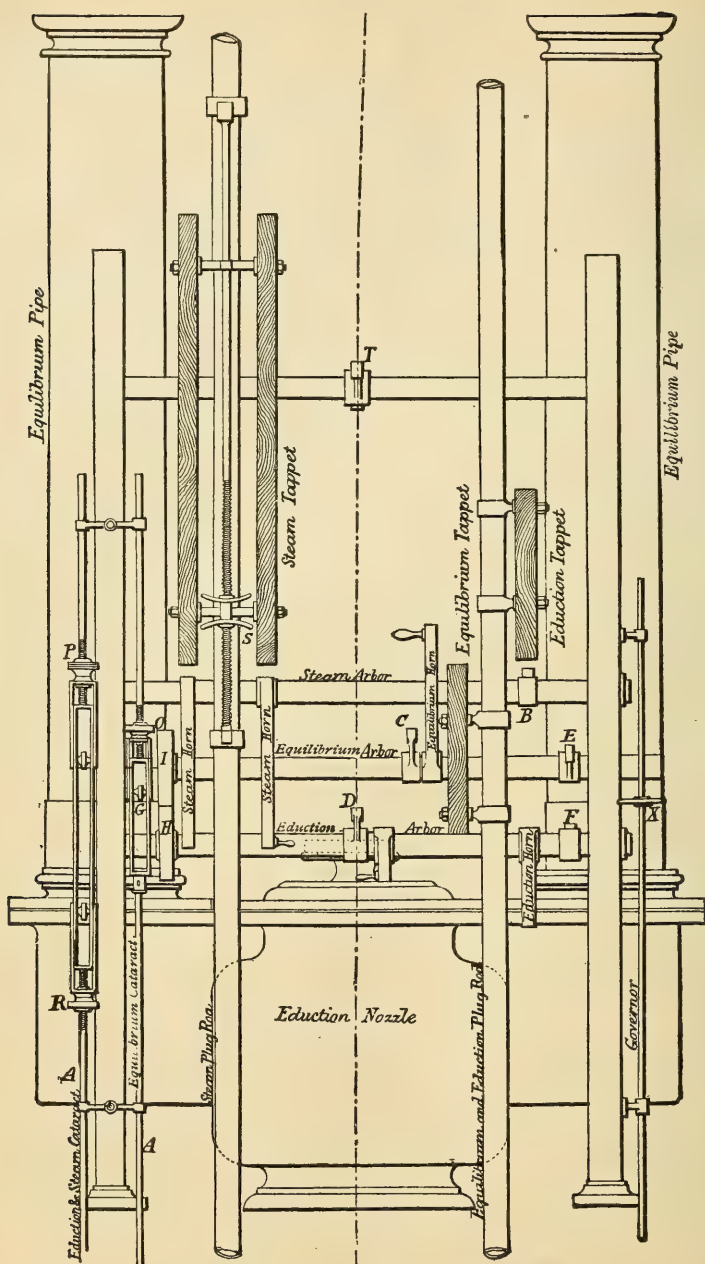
Valve Gear of a 90-inch Cornish Pumping Engine.—Front Elevation.
